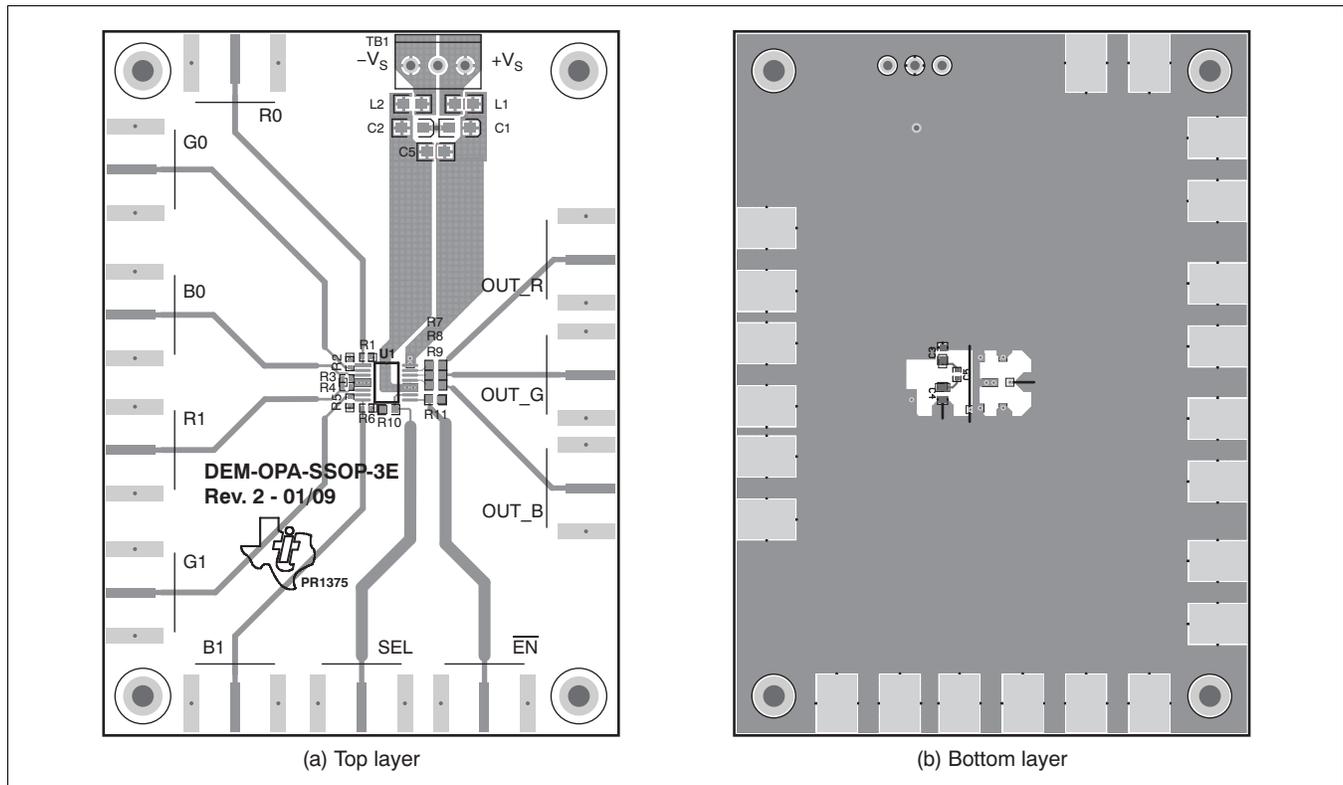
DEM-OPA-SSOP-3E Demonstration Fixture Layout
